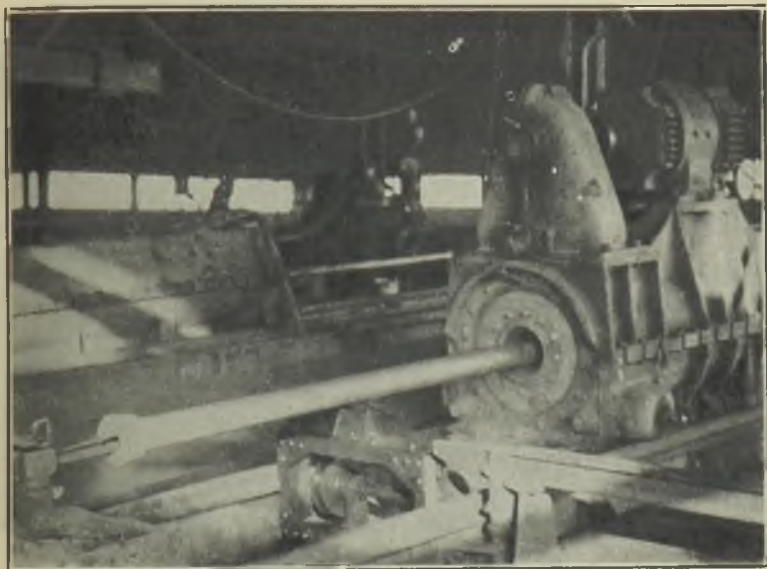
WITHDRAWING PIPE FROM MOULD.
